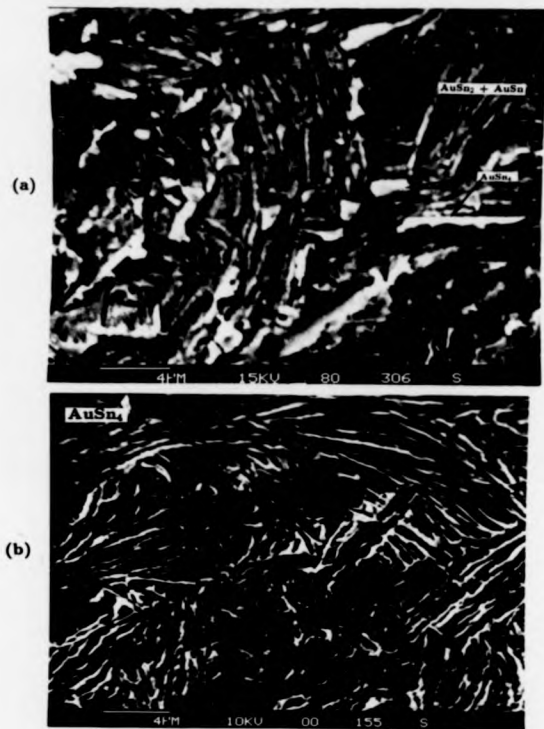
SEM micrographs of the fracture surfaces of an as-prepared Au/PbSnAg joint pulled to fracture; (a) fracture surface on the wire side of the joint, (b) fracture surface on the substrate side of the joint.
